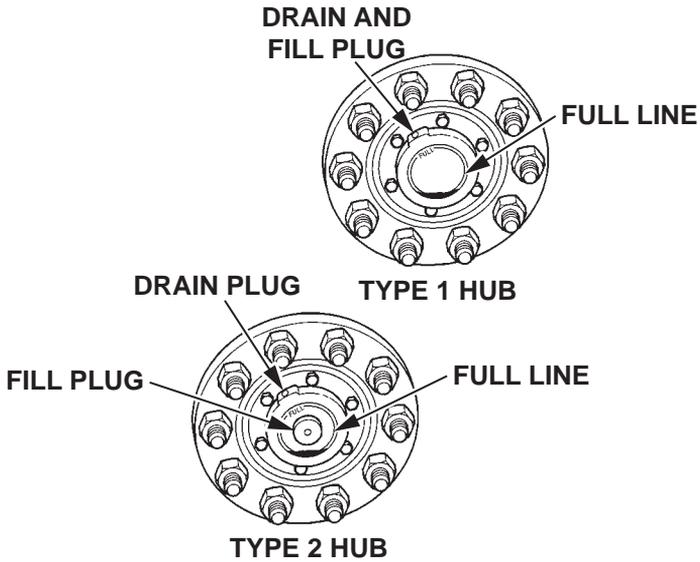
Front Wheel Bearing Level Check and Fill (M915A1).
